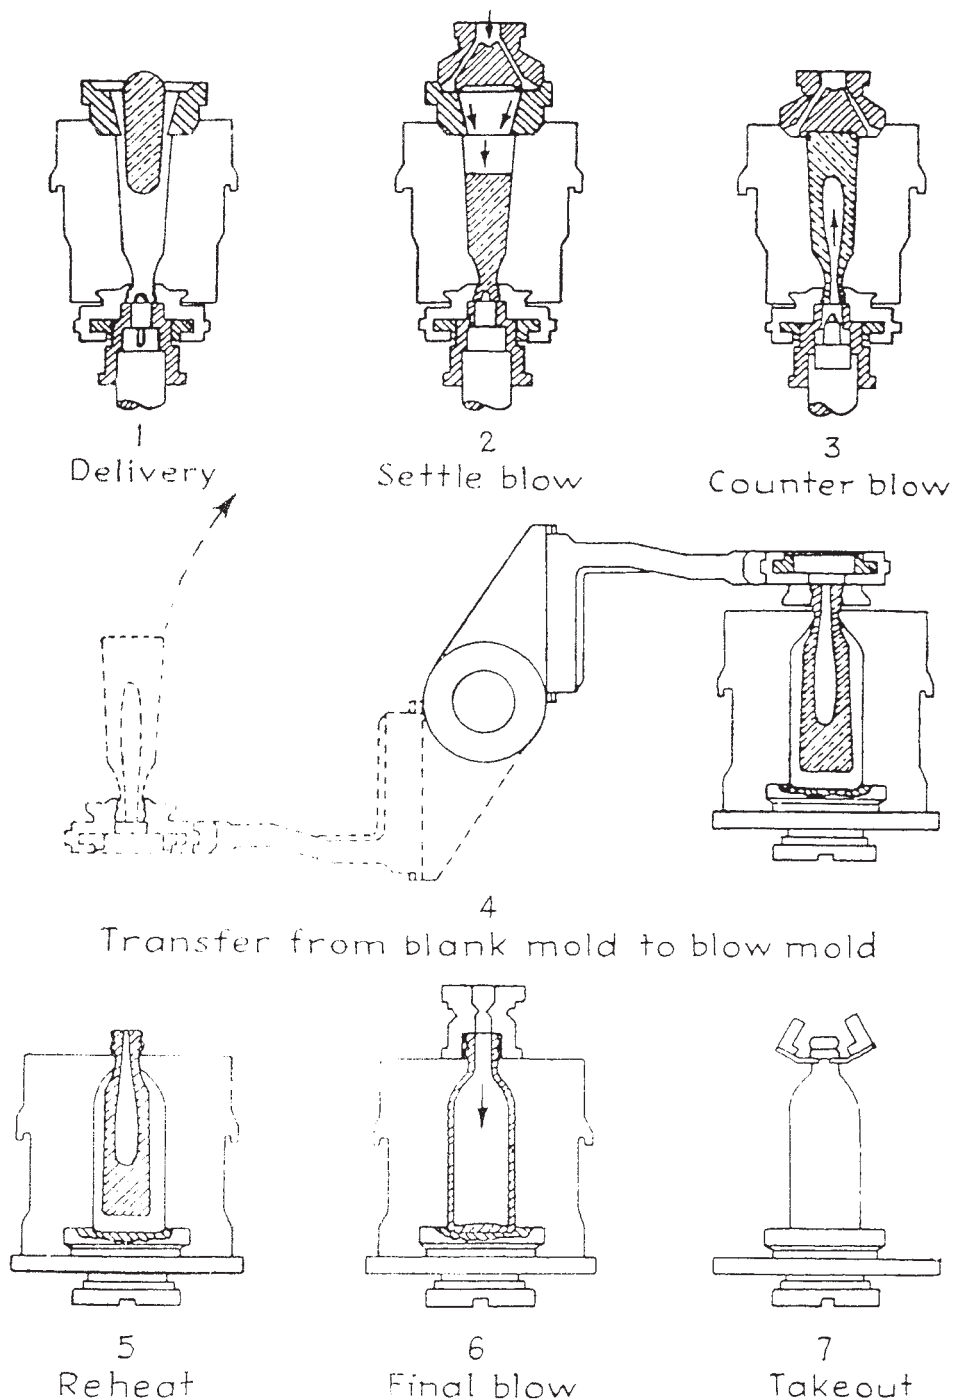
Automatic bottle manufacture by an I-S machine (Glass Packer.)
